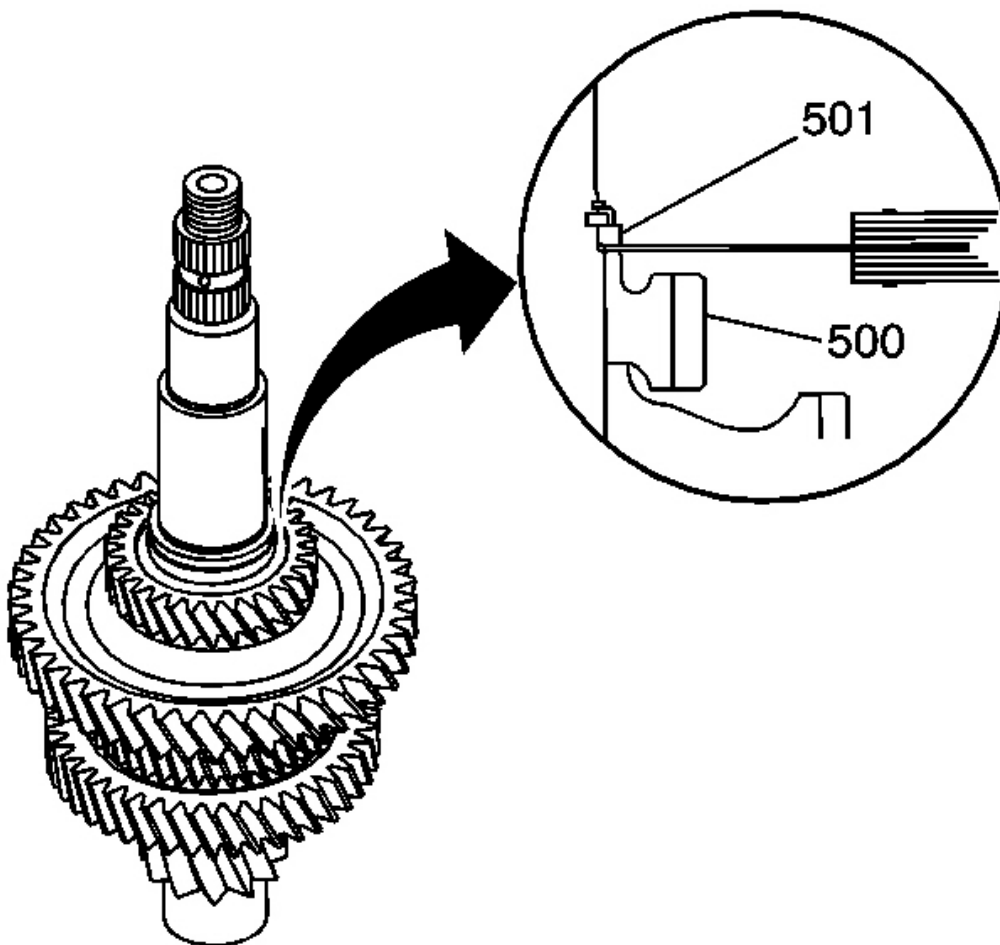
Measuring The Clearance Between The 3rd/4th Driven Gear & 3rd/4th Driven Gear Using A Feeler Gage
